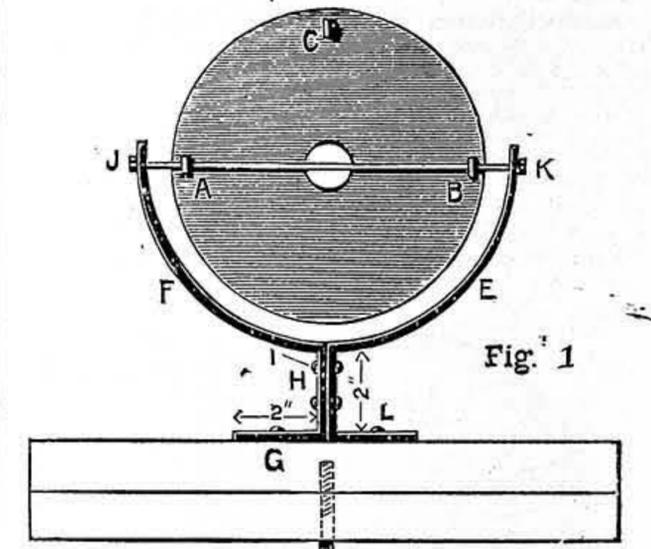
Front View of Helioscope. Fig. 2.—Side View. Fig. 3.—Lever hinged to Stand.
